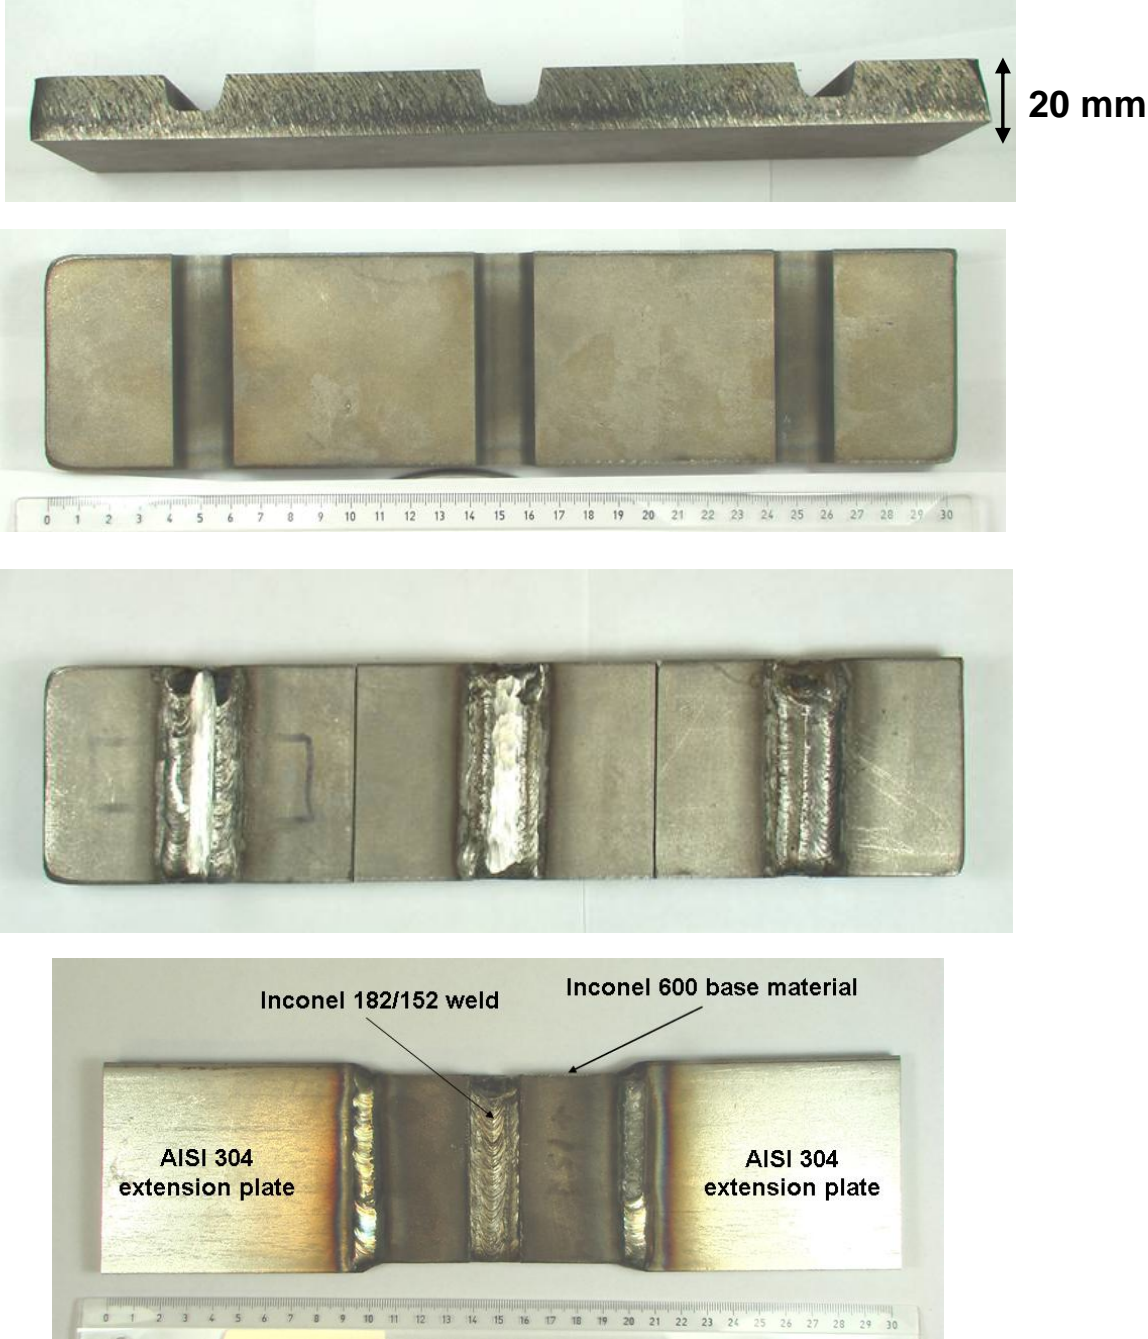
WEDM machining and welding of the preparations on Alloy 600 base metal plates for trans-Varestraint tests.
